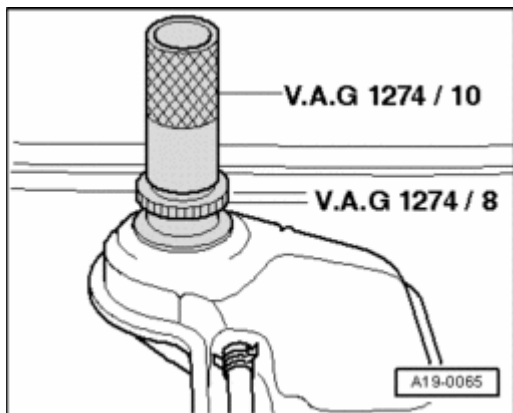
Screw Adapter VAG1274/8 Onto Coolant Expansion Tank & Fit Special Tool VAG1274/10 Onto Adapter
